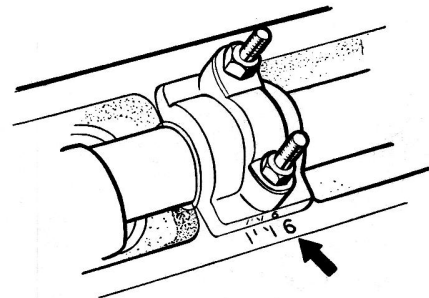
Corresponding numbers on cylinder head and camshaft bearing cap
